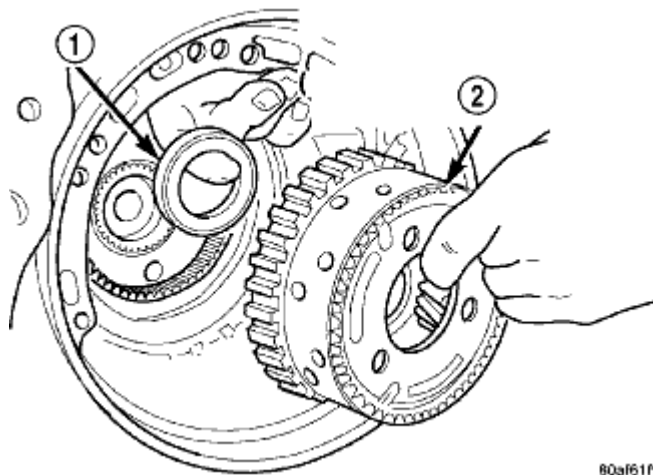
Remove Front Carrier & Rear Annulus Assembly
